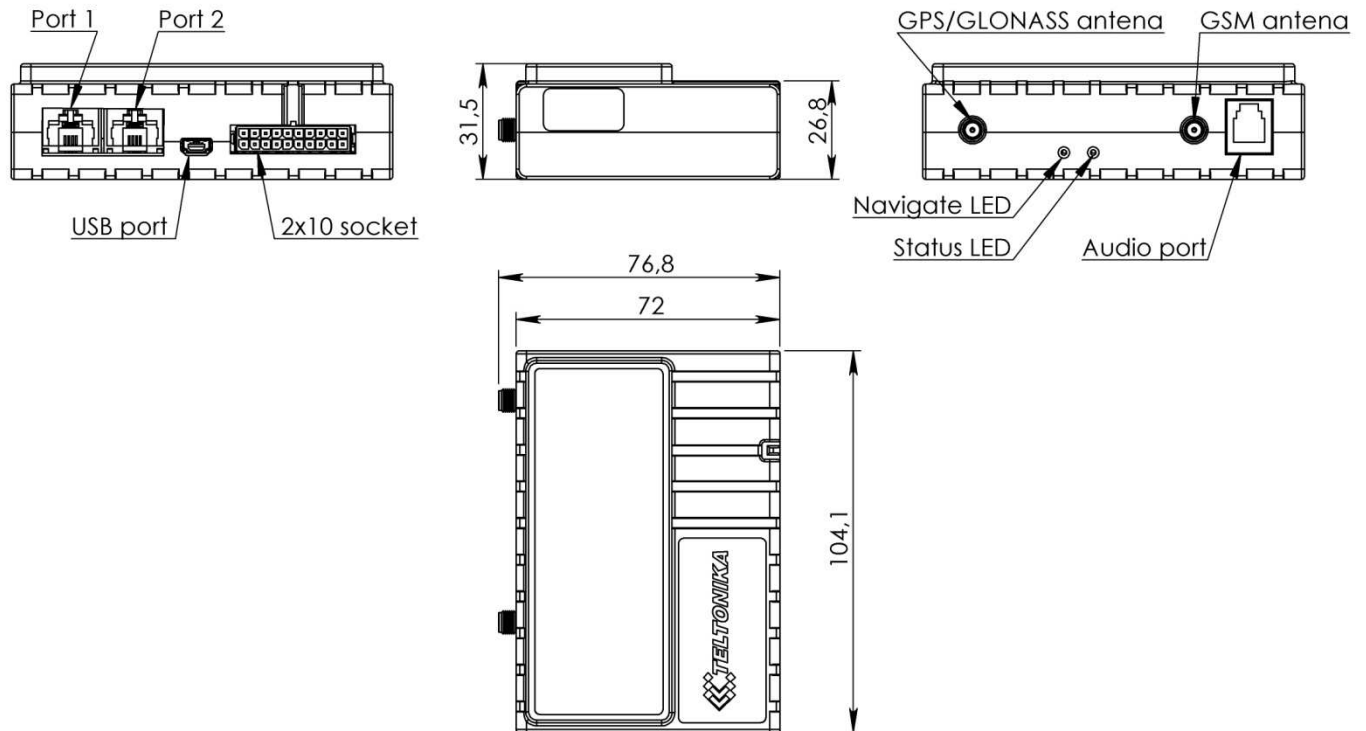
FM5300 view & dimensions in mm (tolerance $\pm 2\text{mm}$)
